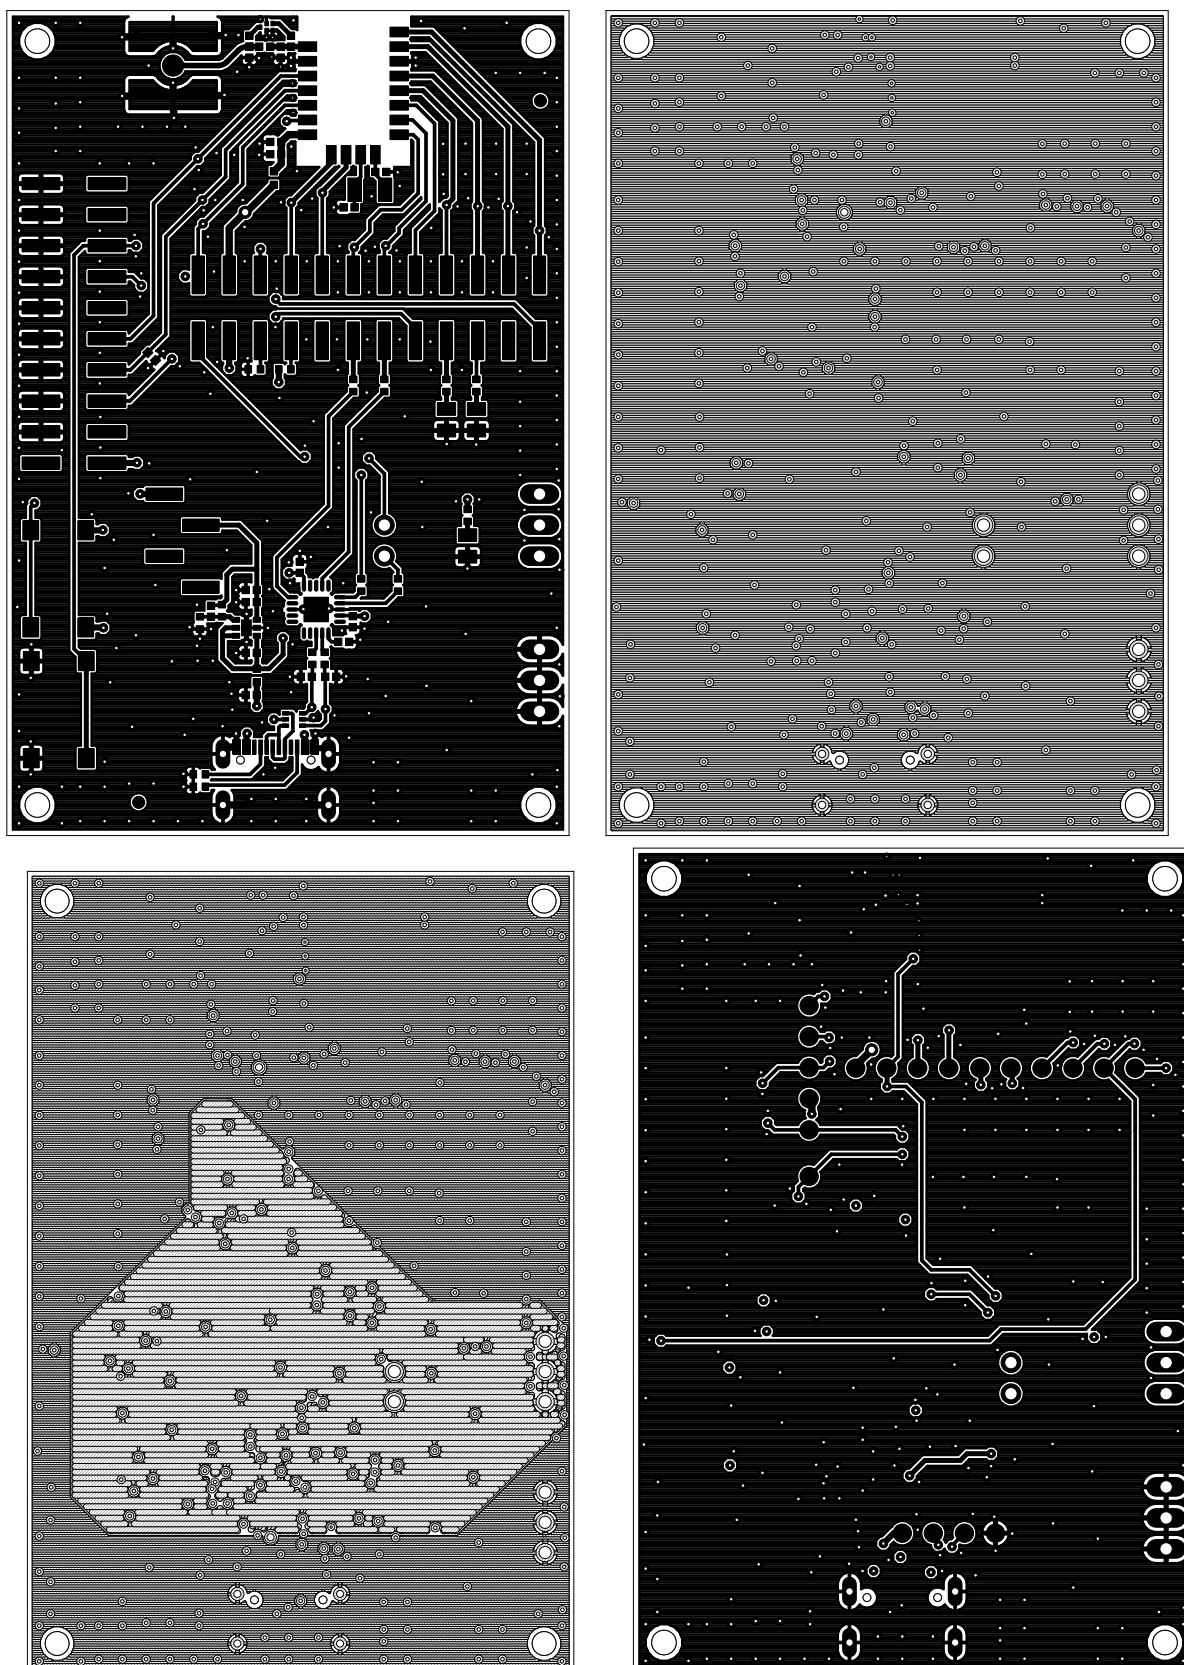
Top, Layer 2, Layer 3 and Bottom Layer
